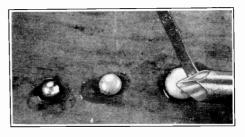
Method of increasing the size of a molten globule of solder by feeding rosin-core solder to the soldering iron tip while it is in contact with the globule. The three globules used in Experiment 2 are shown clearly in this view. The darker rings on the board around each globule are formed by the surplus rosin flux, which is a yellowish liquid when heated.
